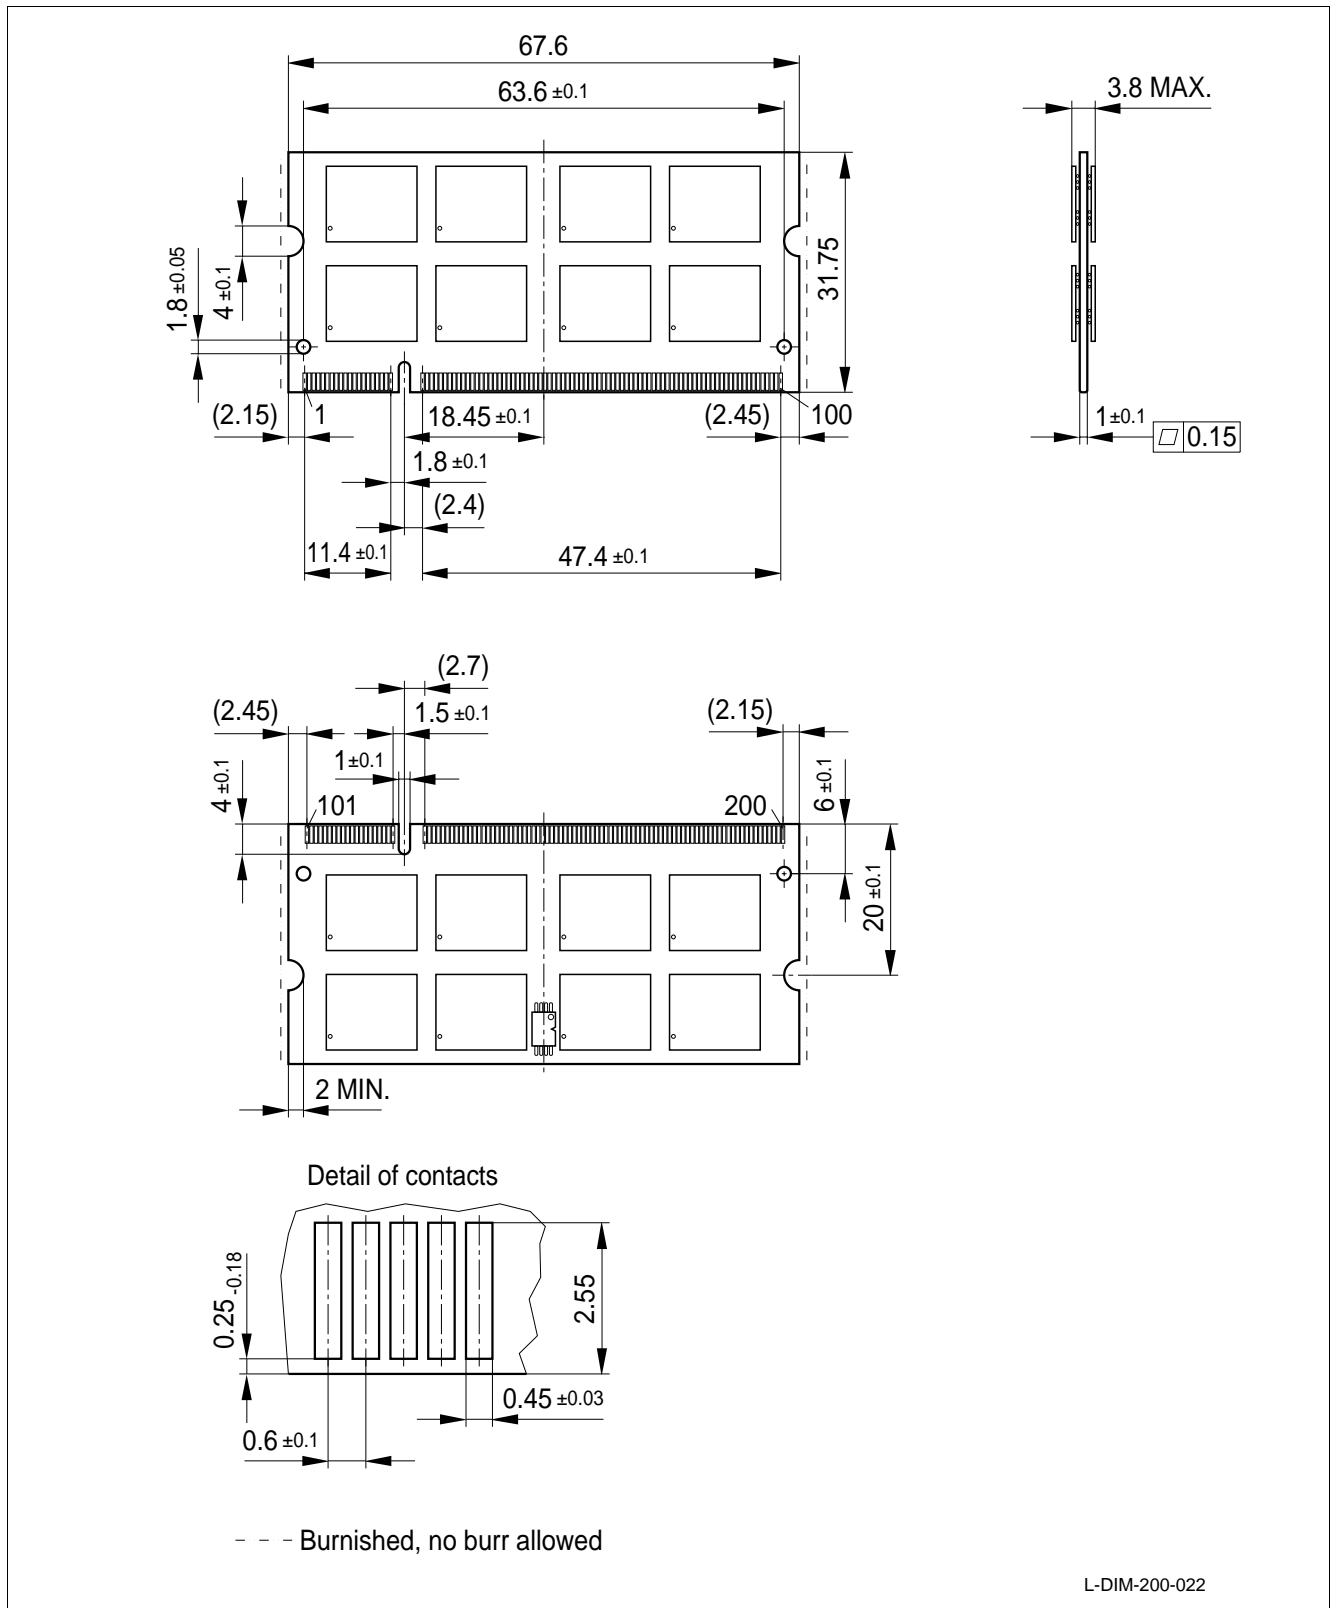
Package Outlines – DDR-SDRAM SO-DIMM HYS64D128021[H/G]BDL-[5/6]-B
